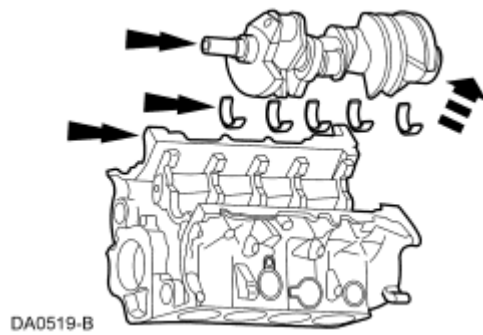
Removing Crankshaft, Upper Crankshaft Main Bearings And Upper Thrust Washers From Cylinder Block
